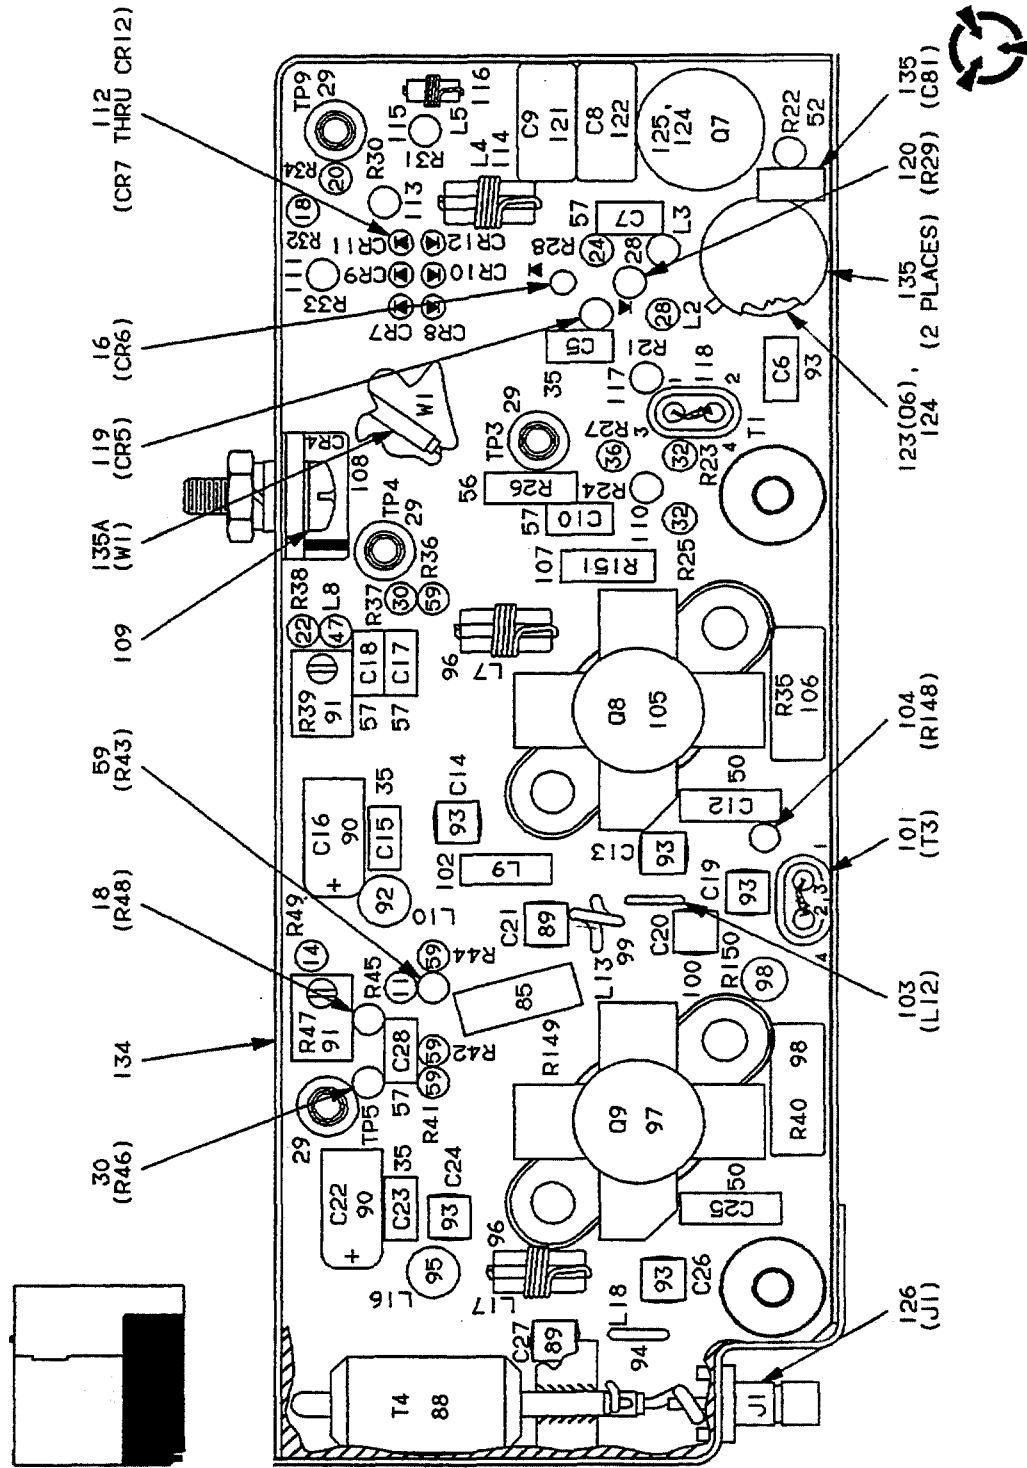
High Band Amplifier Module Assembly (Sheet 3 of 4)
